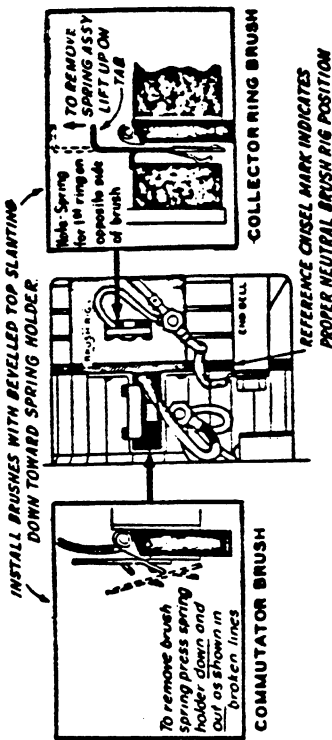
NEUTRAL BRUSH POSITION & CONSTANT PRESSURE TYPE SPRINGS
